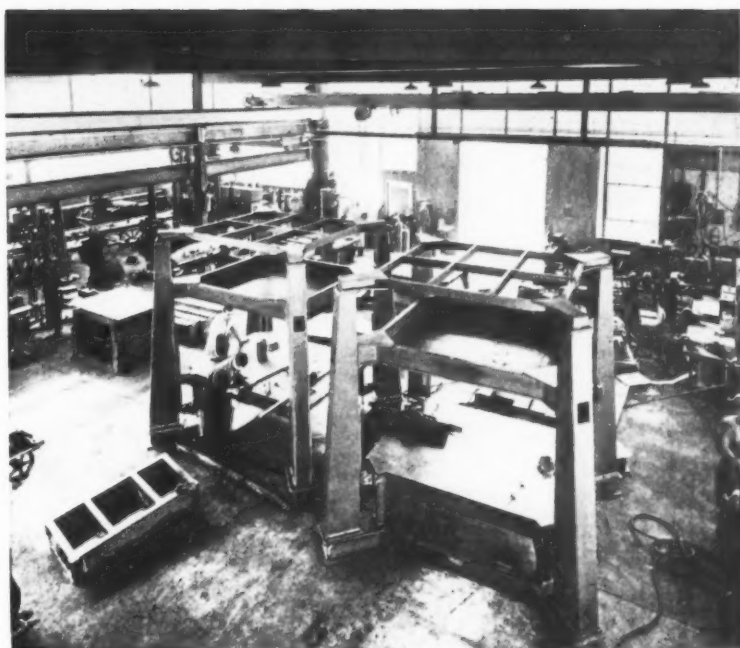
Two Welded Frames for Large Hydromatic Welders
